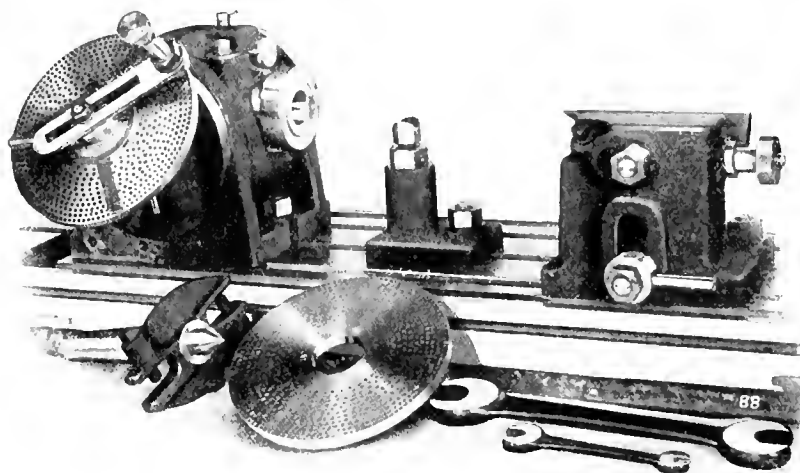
New Type of Universal Dividing Head, brought out by the Kempsmith Manufacturing Co., Milwaukee, Wis.
